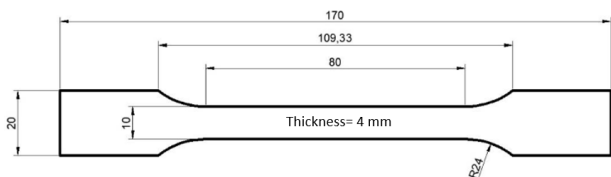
Tensile test sample dimensions in ISO-527-2-type-1A standard [32]
